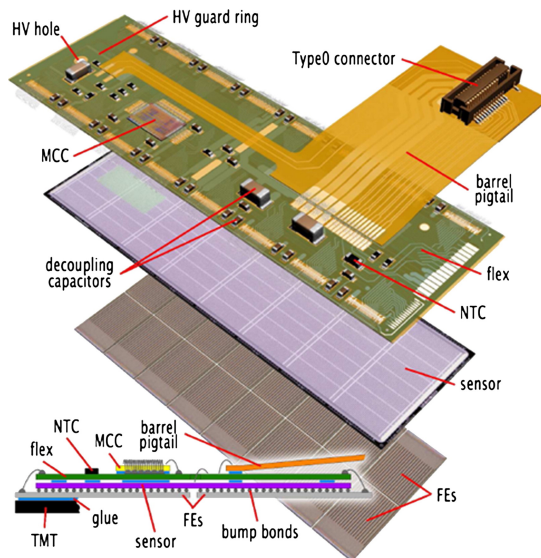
View of the different parts of an ATLAS pixel detector module. Starting from the bottom: FE chips, sensor, flex hybrids with passive components. A side view of the module is also shown, where the bump bond connection between electronics and sensor can be seen. The module has a total area of $63 \times 24.2 \text{ mm}^2$ [20].
